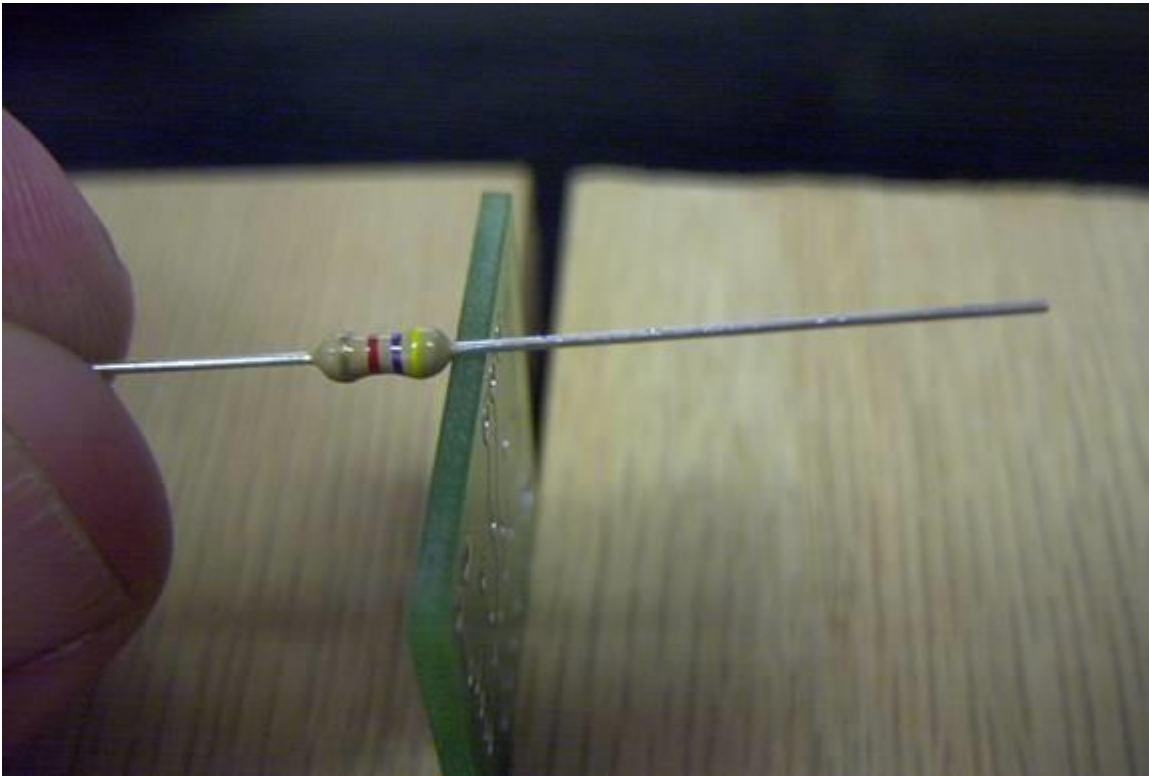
Resistor being held over the edge of the board prior to bending. Note that the edge of the resistor is right against the edge of the board. This is important.
